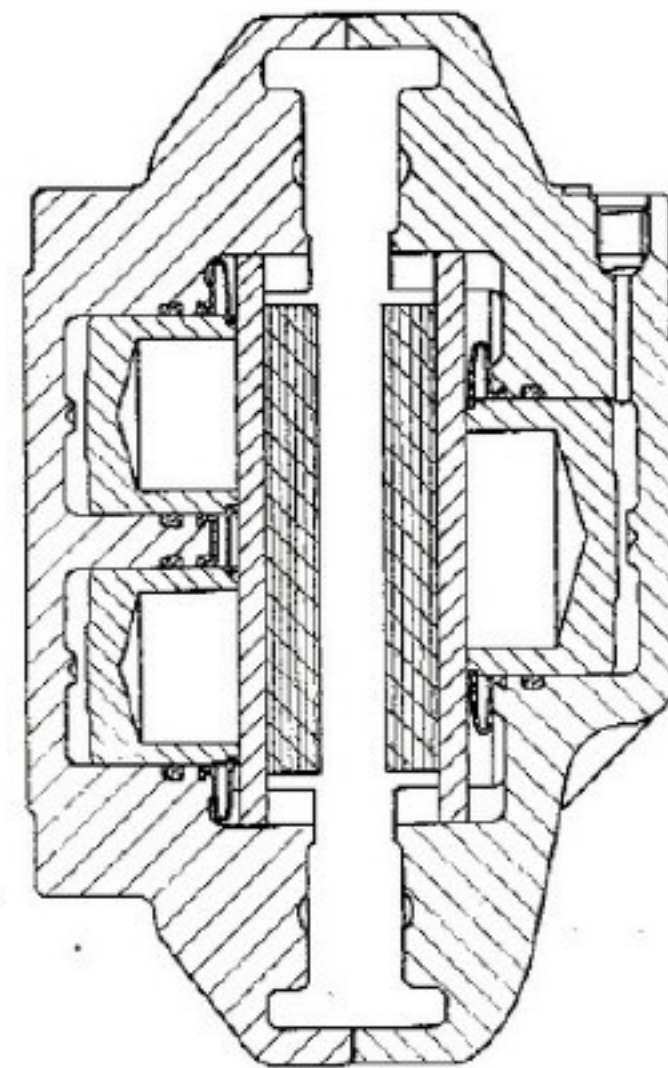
Front caliper - Section through pistons, lining pads and backing plates.
